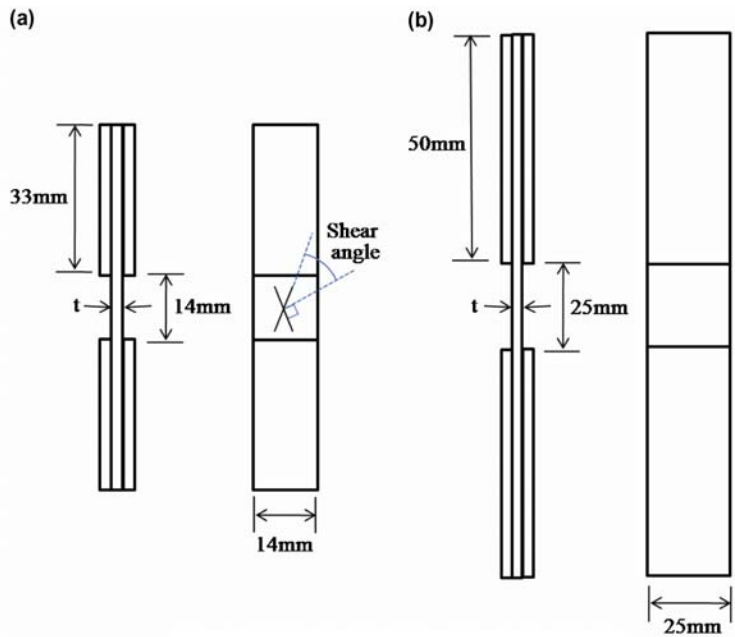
Fabric composite specimens: (a) static compression test and (b) fatigue test.
